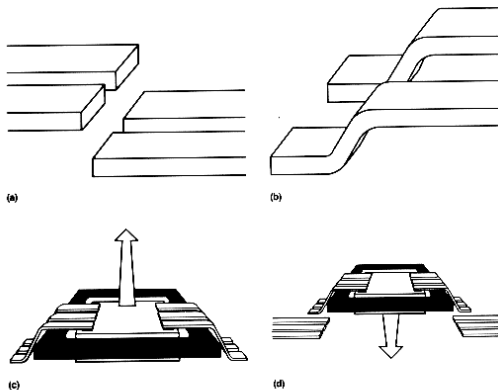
Steps of outer lead bonding. (a) Excising. (b) Lead forming. (c) Transporting. (d) Welding or soldering. Source: Ref 101-103
